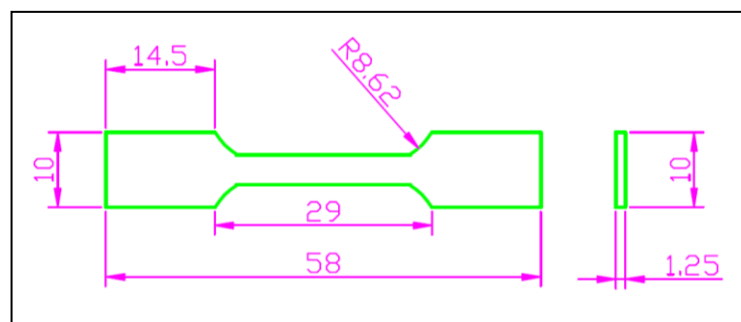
Sample Dimension Guideline (Unit in mm)
